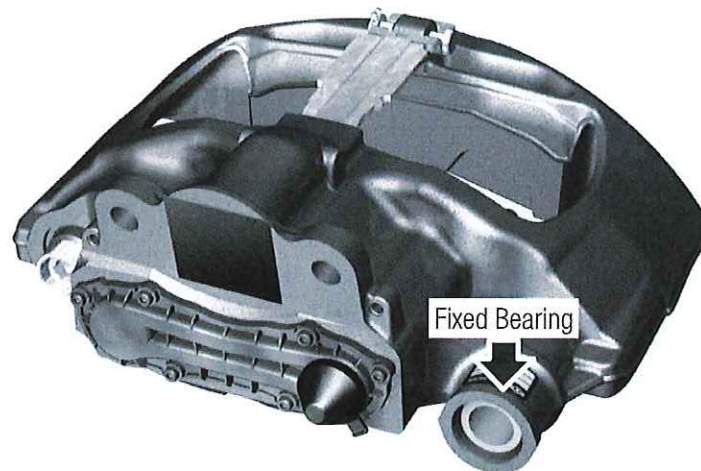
Typical Axial Disc Brake - Fixed Bearing with Cap removed
